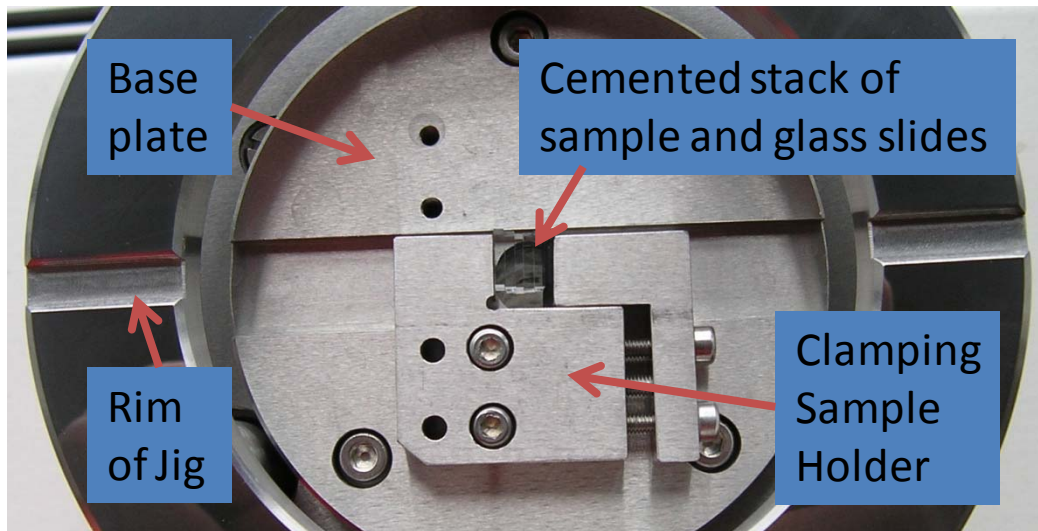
Picture of samples mounted in sample holder for end-face polishing.
